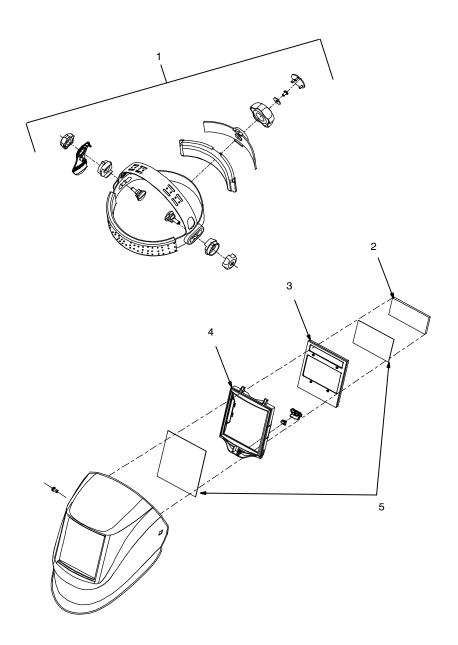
Inventor Series Auto-Darkening Welding Helmet
